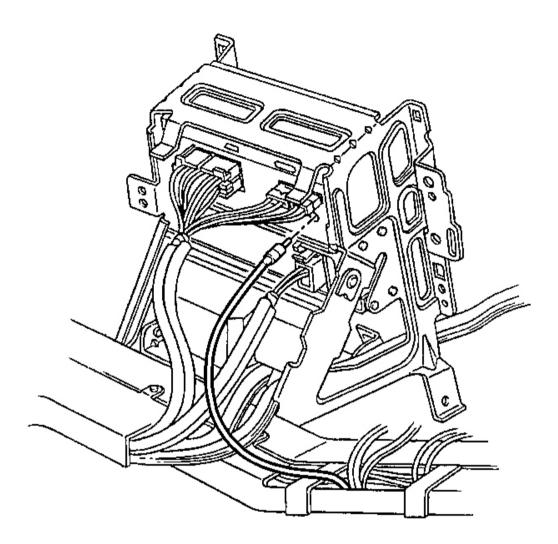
Radio Control Coaxial Cable At IP Wiring Harness Courtesy of GENERAL MOTORS CORP.
